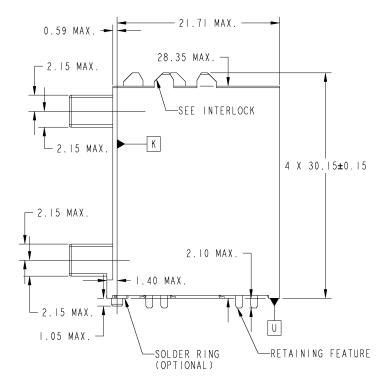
Stacked SMT connector, side view, 19.9mm pitch
